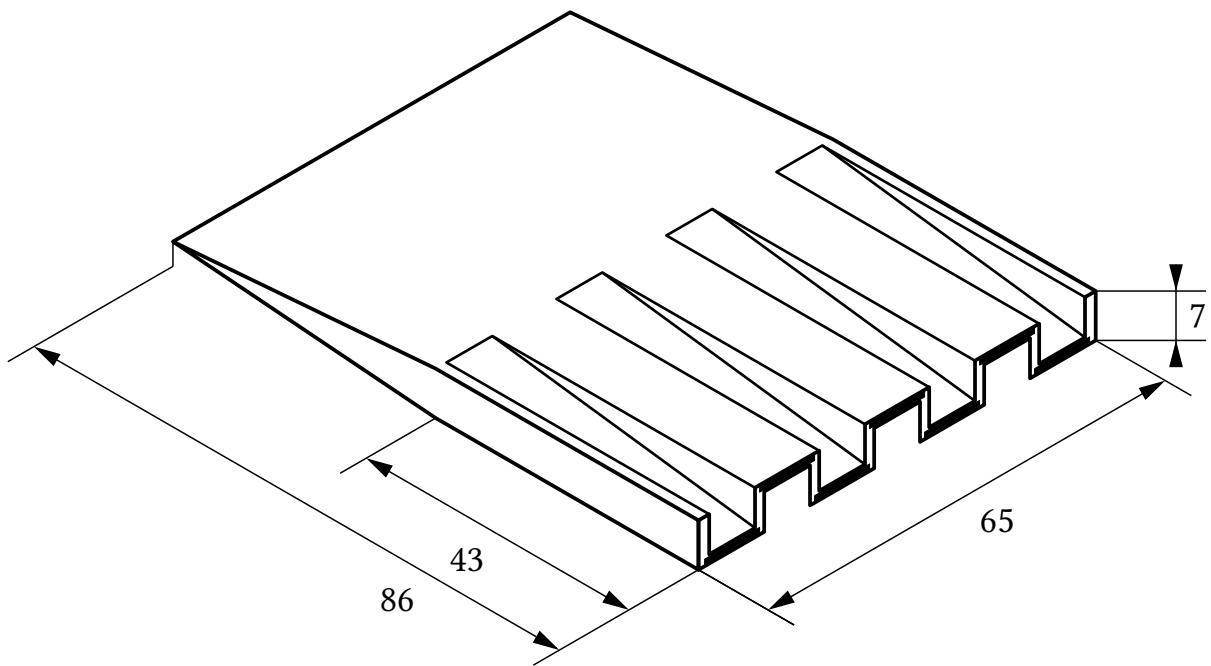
Isometric view of the injector geometry, dimensions in mm.
